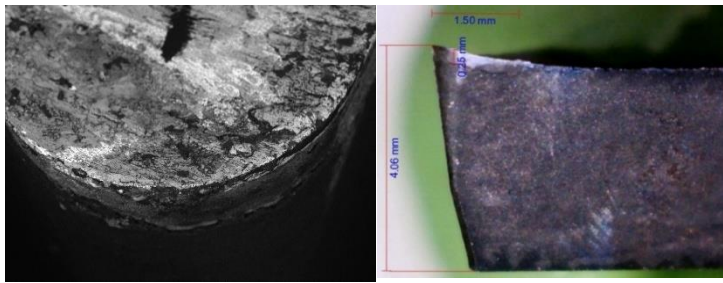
Flank wear (VB) 0.25 mm observed during the initial wear stage of the coated carbide tool in the machining of AISI 1070
